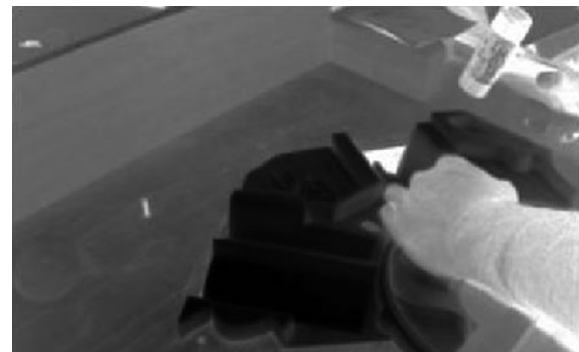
Casting pattern (drag) hybrid design and manufacture including modular assembly
